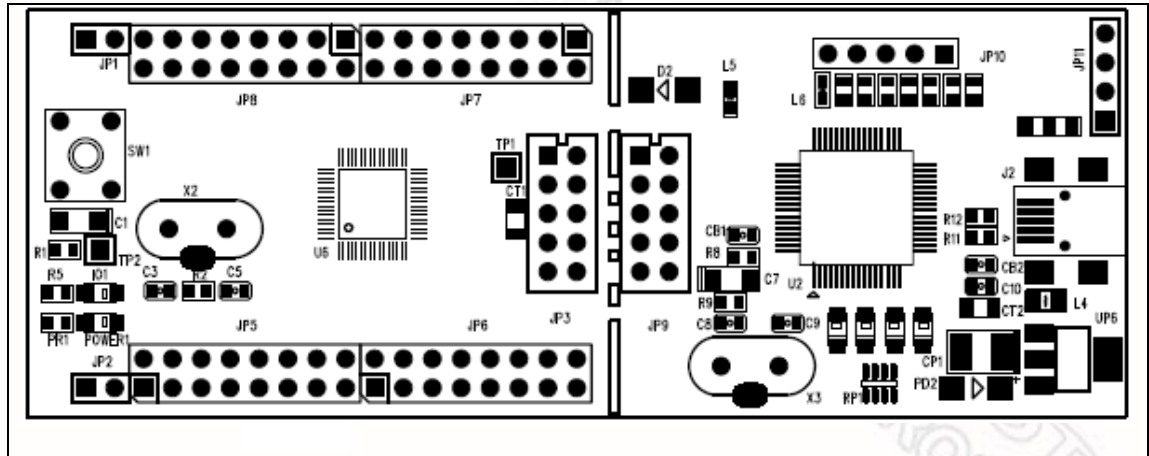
NuTiny-SDK-M058S PCB Placement
